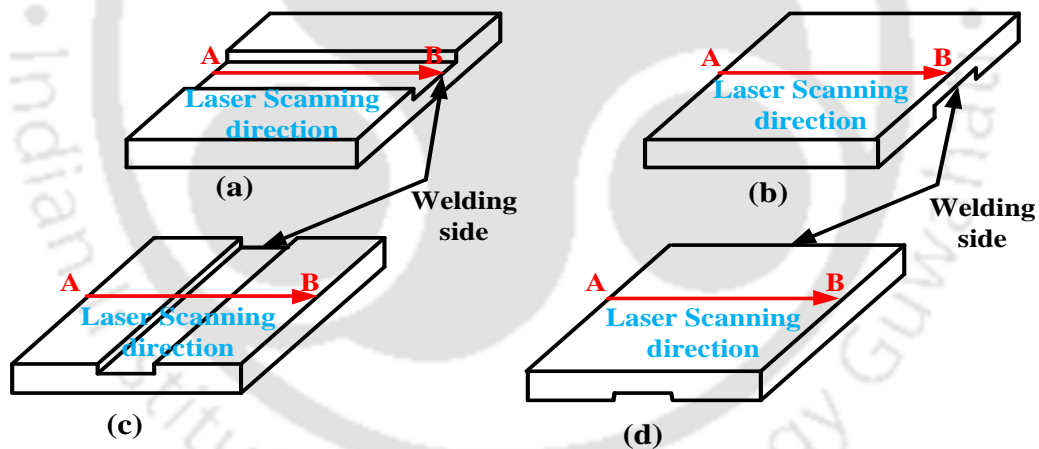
The scanning scheme on friction stir welded sheets: (a) along welding direction on the top surface, (b) along welding direction on the bottom surface, (c) across welding direction on the top surface and (d) across welding direction on the bottom surface
